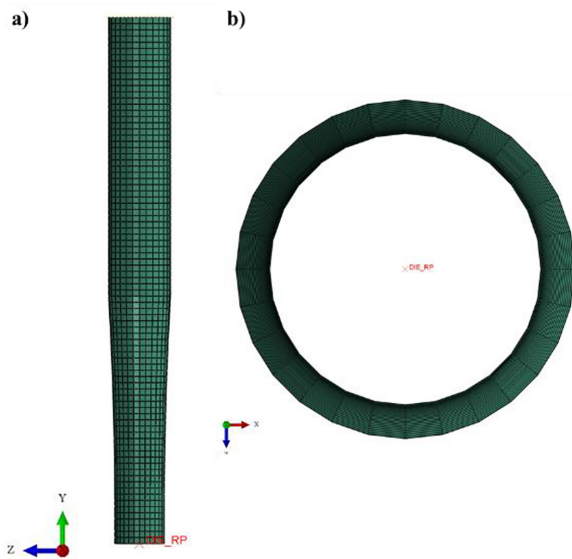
Example of finite elements distribution for a single-cavity die: (a) in longitudinal section, (b) in cross-section
